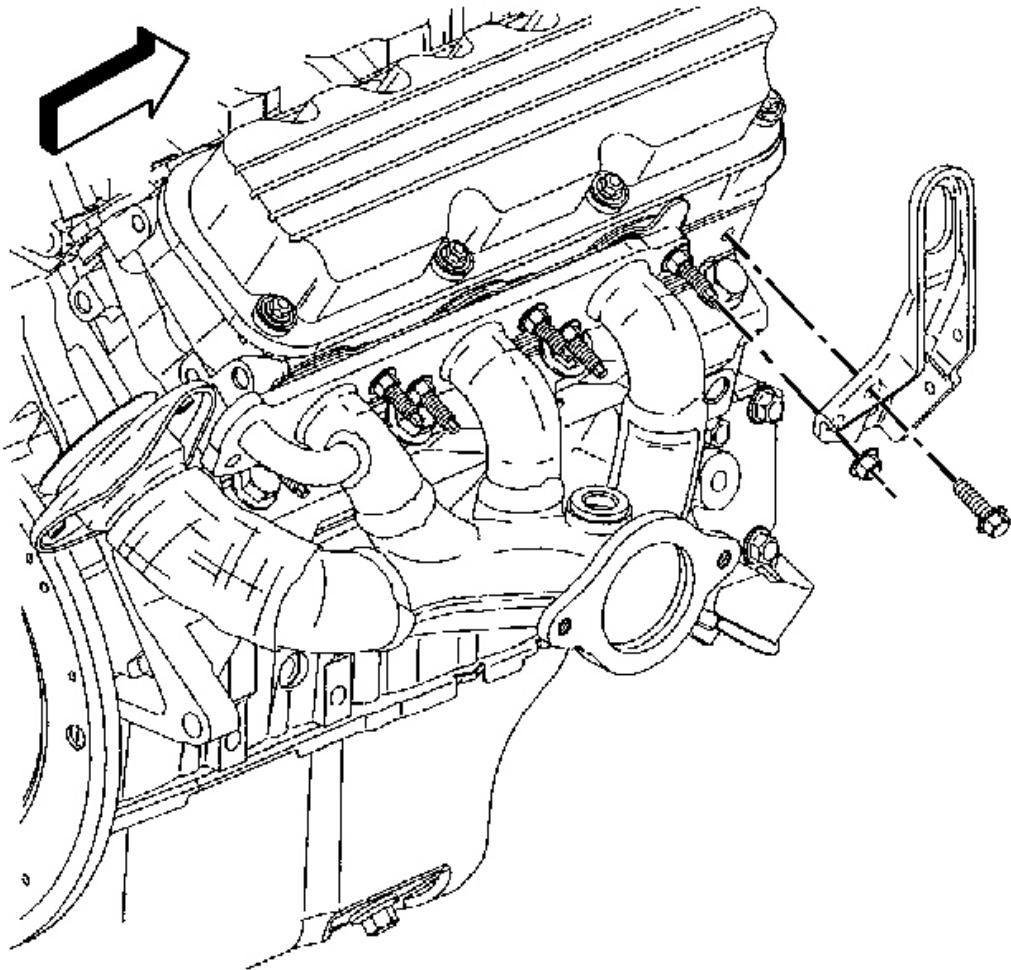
Locating Fuel Injector Sight Shield Cover Bracket
